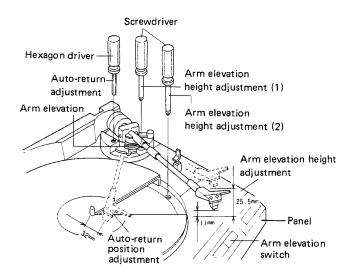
Arm elevation height adjustment and auto-return adjustment
